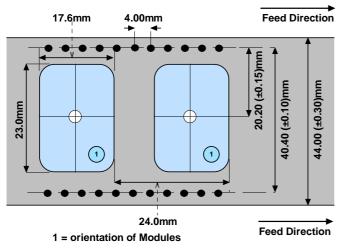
Dimension of reel for 250 pieces (dimensions unless otherwise specified in mm)
